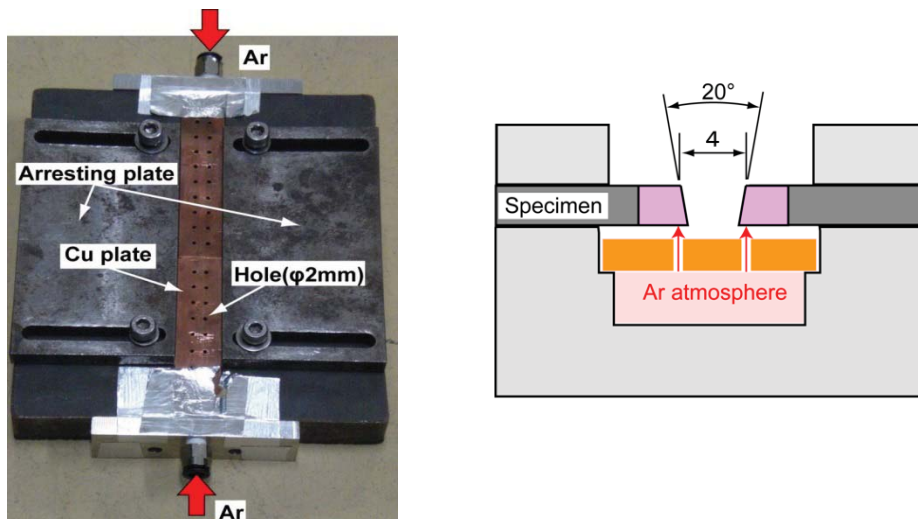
Schematic illustration of butt welding using hot-wire laser welding.
